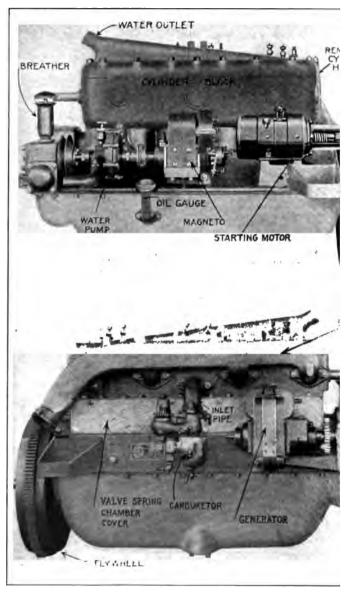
Views of Overland Model 82 Six Cylinder Motor.
